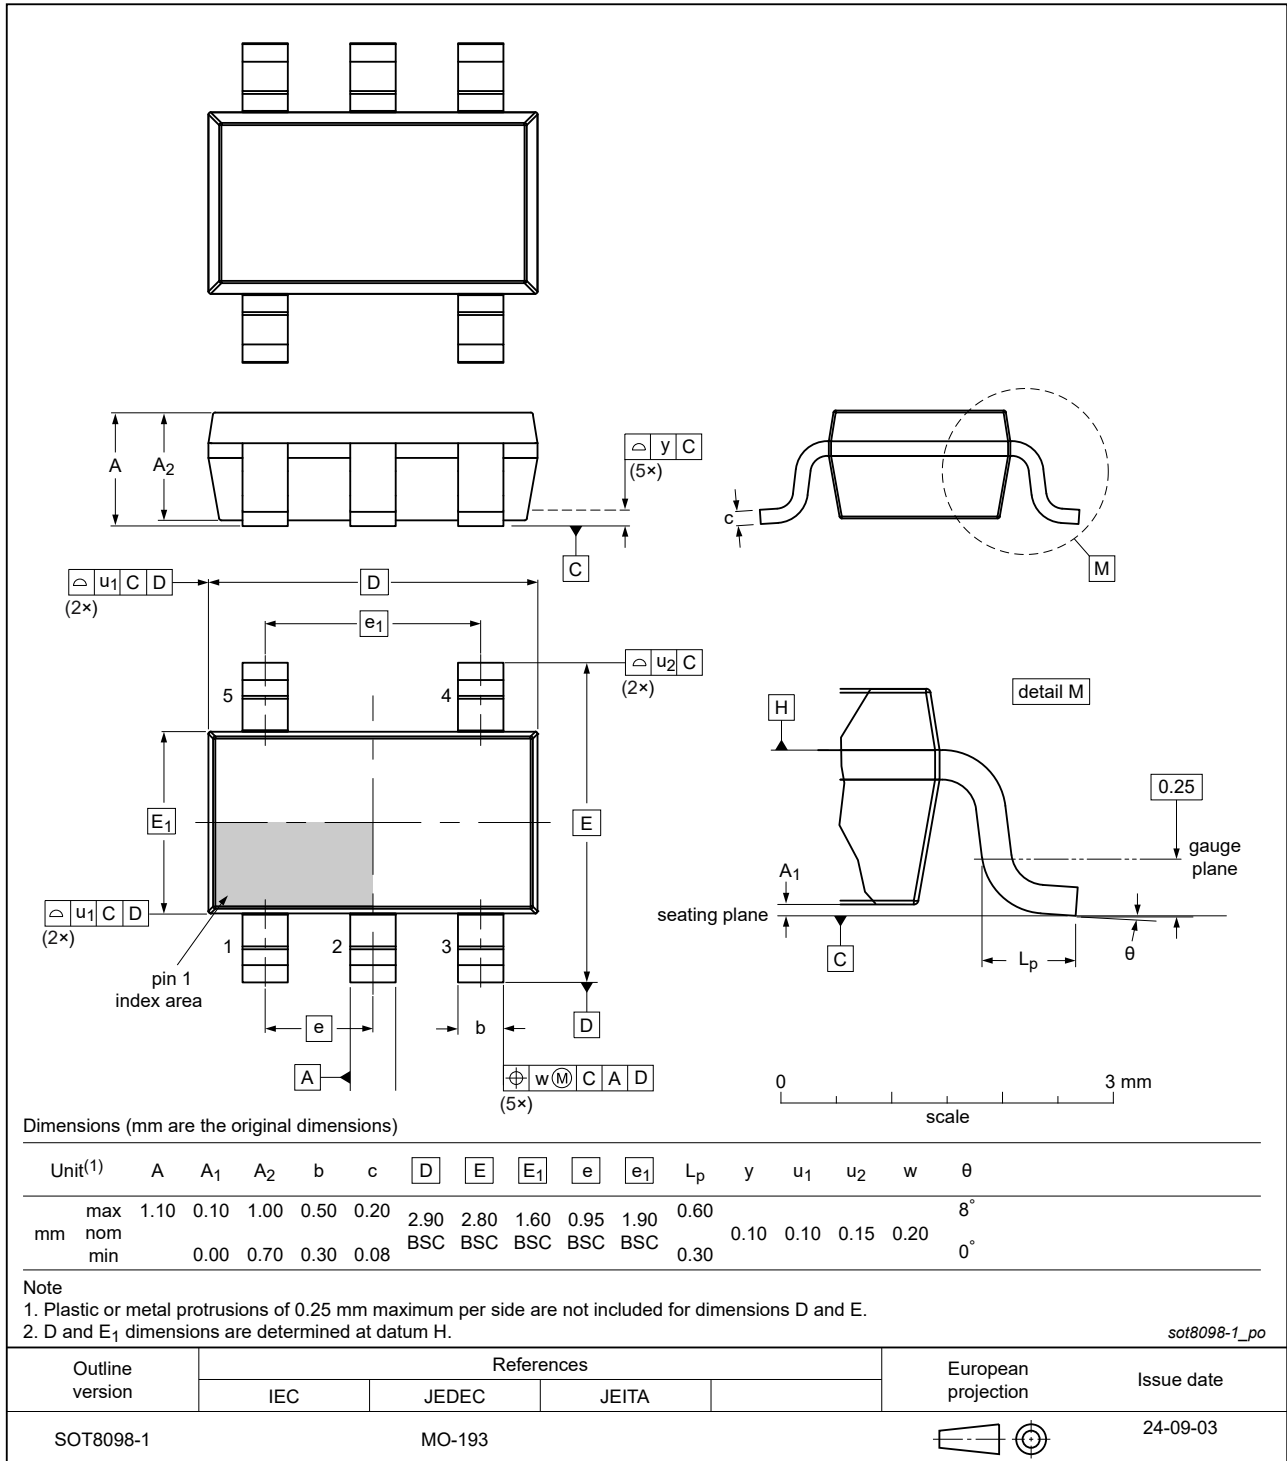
Package outline SOT8098-1 (TSOT23-5)
